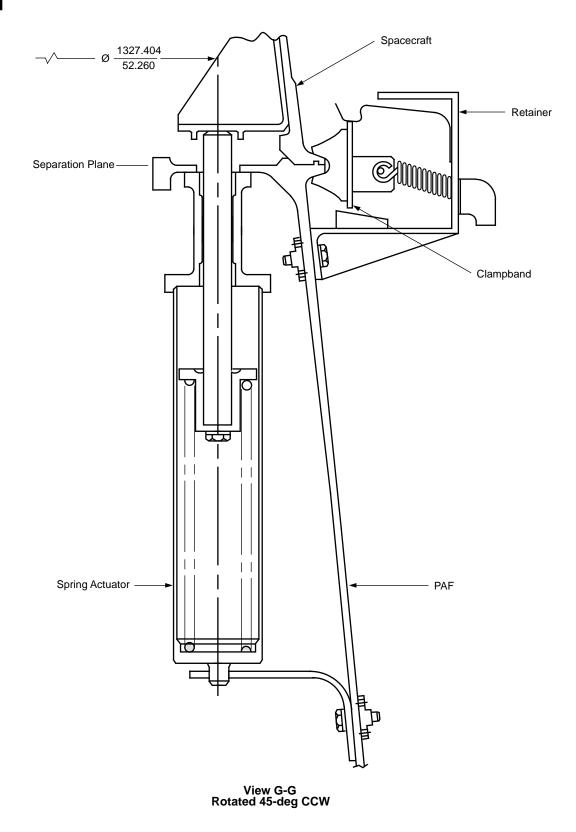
5624 PAF Clamp Assembly and Spring Actuator (Download Figure)
